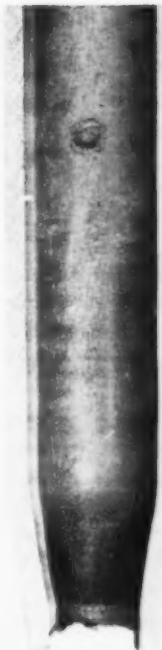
Internal face of fire side of tube in service 67 days, showing deep pitting
